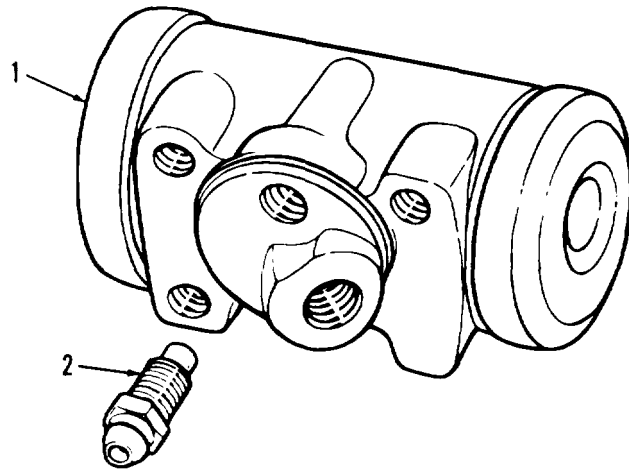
WHEEL CYLINDER ASSEMBLY (M514).
